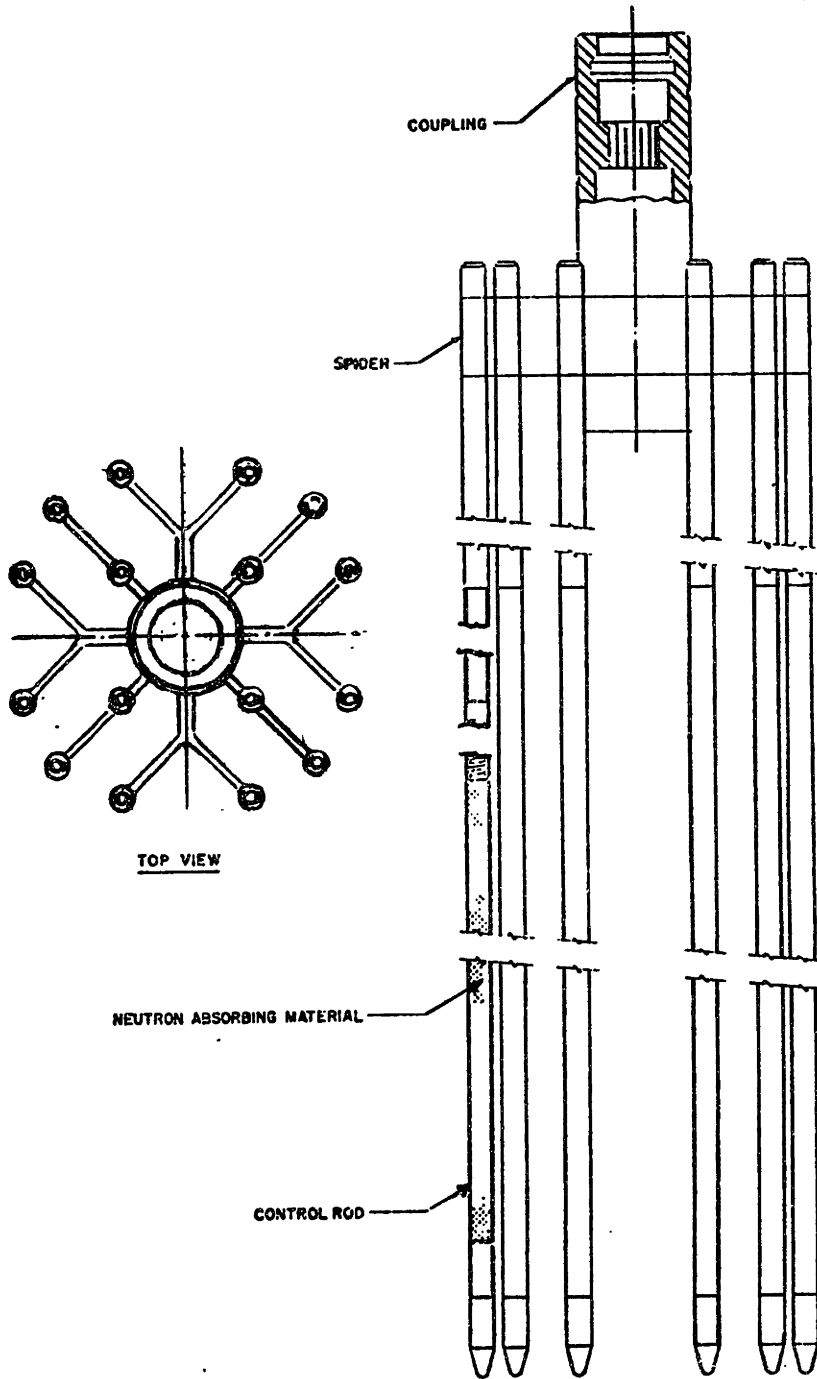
CONTROL ROD & SPIDER ASSEMBLY OF THE INTEGRAL CNSG IV
